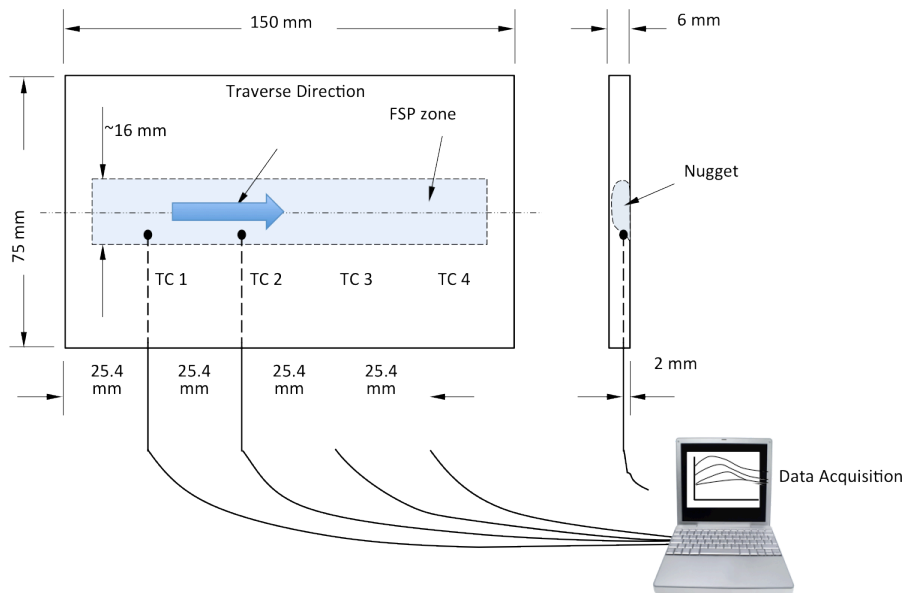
Schematic diagram showing workpiece with inserted thermocouples.
